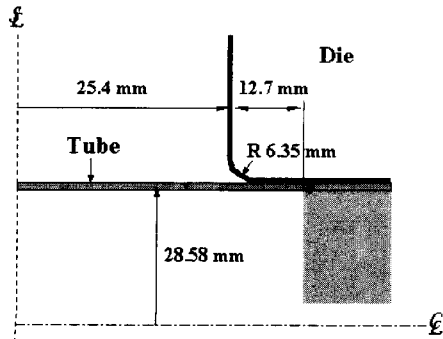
Tooling geometry of tube bulging⁽¹²⁾
